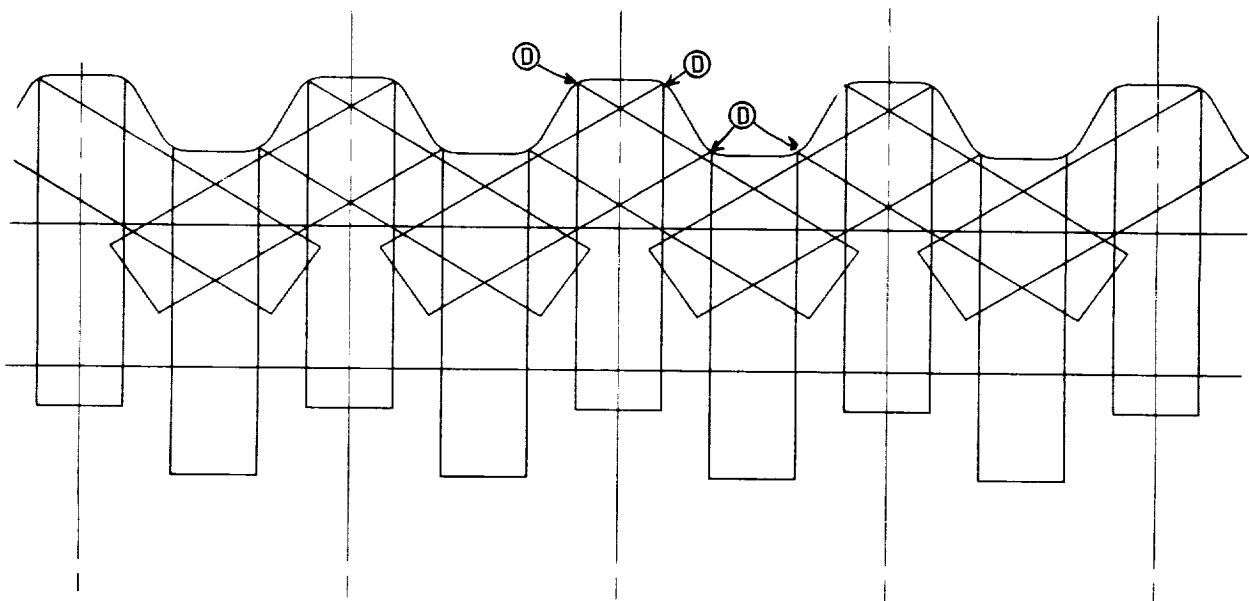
Cutting of flanges for curved corrugated stiffener.
